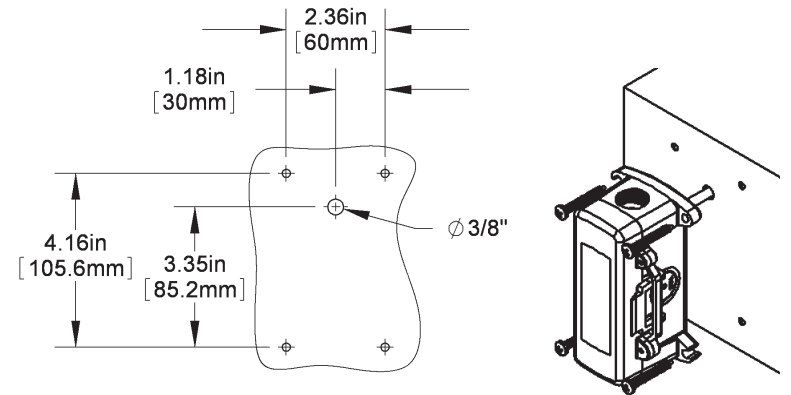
BAPI-Box 2 (BB2) Enclosure Mounting Holes
